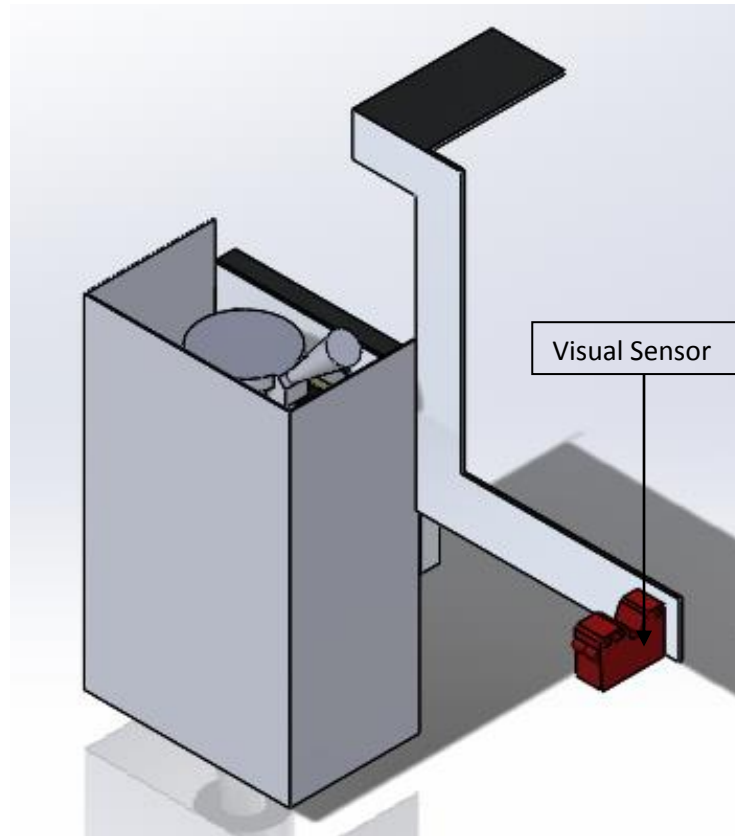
Sensor/Chain bracket shown attached to glue gun mounting bracket assembly.
